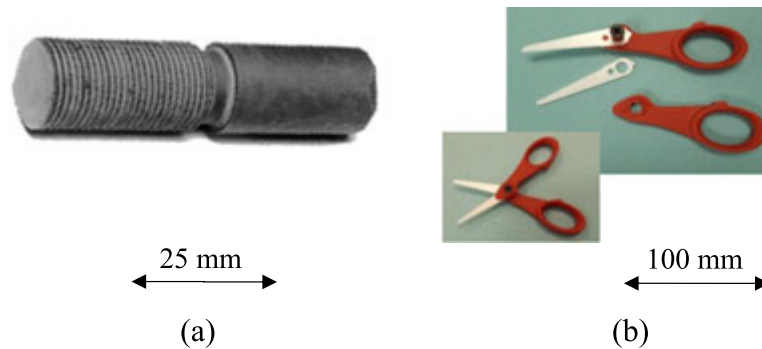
(a) Silicon nitride rod with a machined-in screw thread and (b) zirconia scissors showing machined-in holes.
